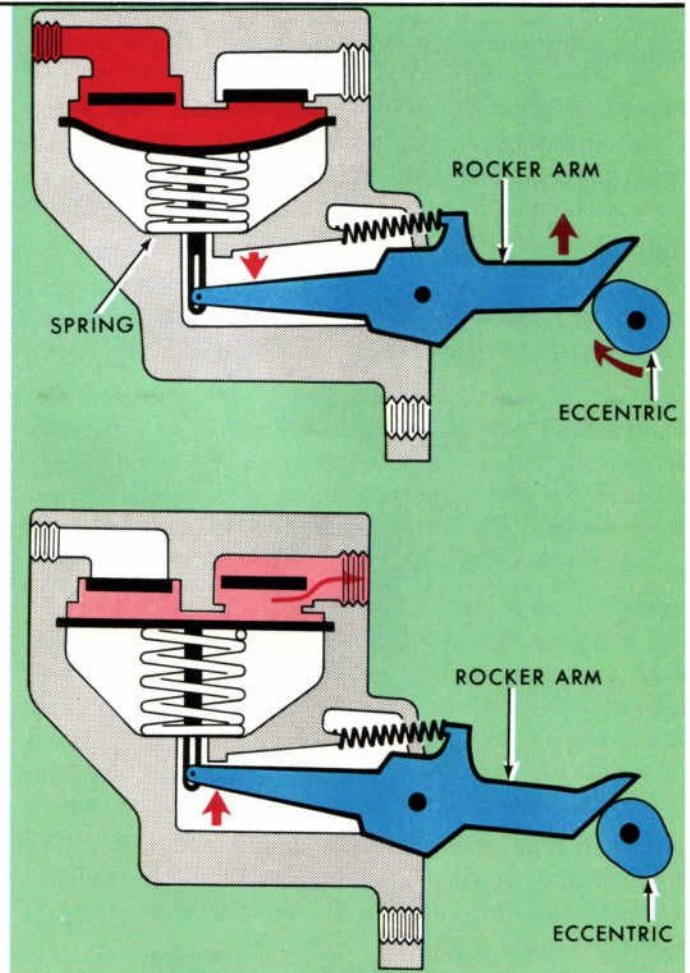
CROSS SECTION OF MECHANICAL FUEL PUMP
